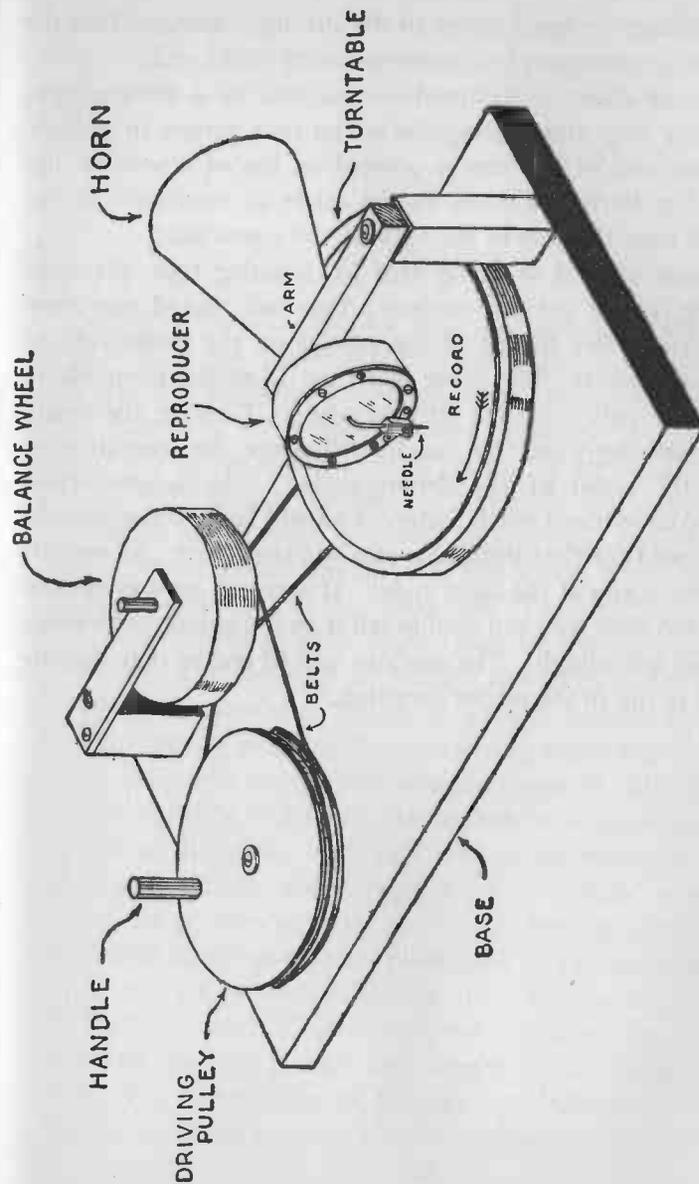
A talking-machine driven by hand power which a boy can make.
